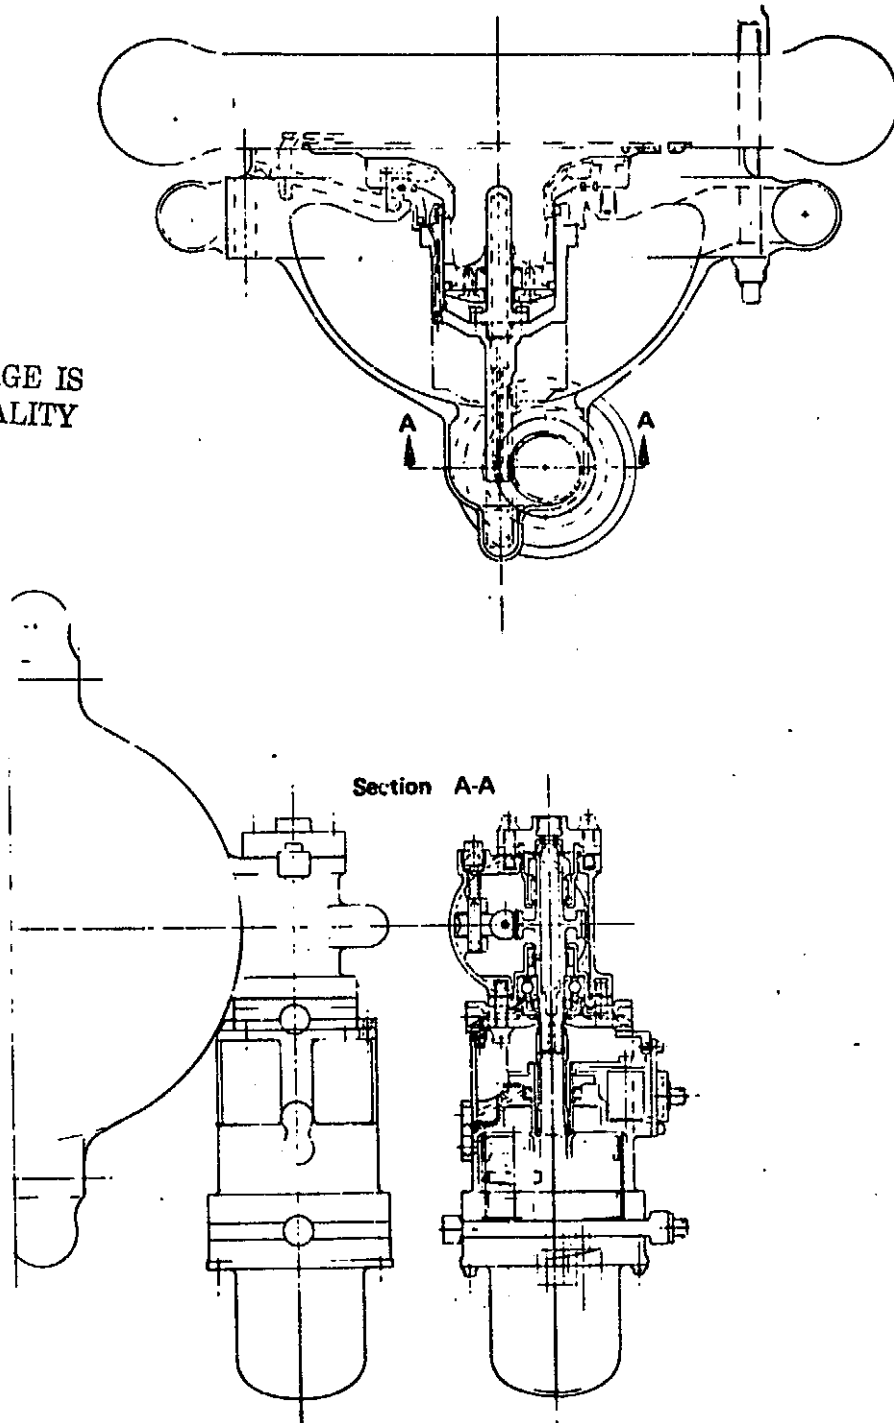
Preburner Oxidizer Valve-Angle Drive
